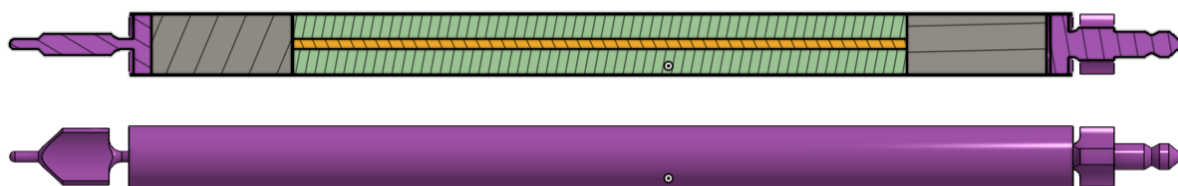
CAD drawing of the JSI TRIGA fuel element. Left: bottom pin, Right: top pin.
